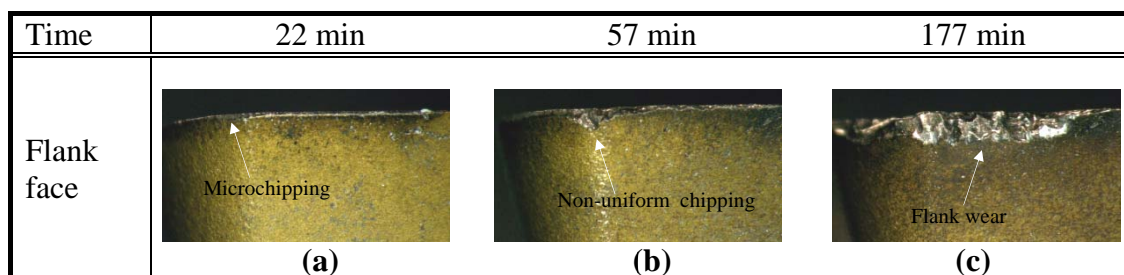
Flank wear evolution during dry machining of P20-ESR steel at cutting speed of 100 mm/min
